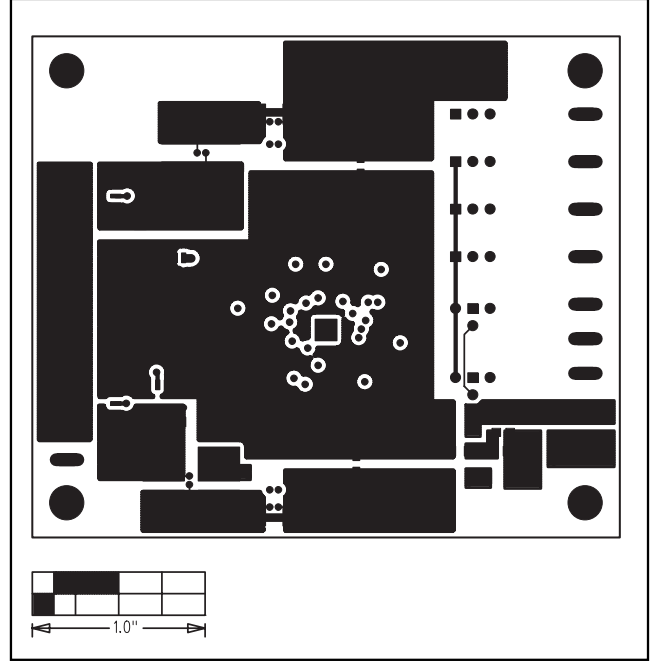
MAX8744A EV Kit PCB Layout—Component Side
